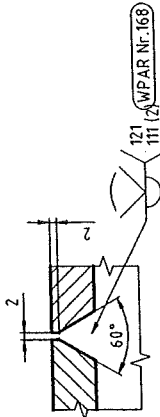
DETAIL OF WELD MANHOLE TUBE M1:1
